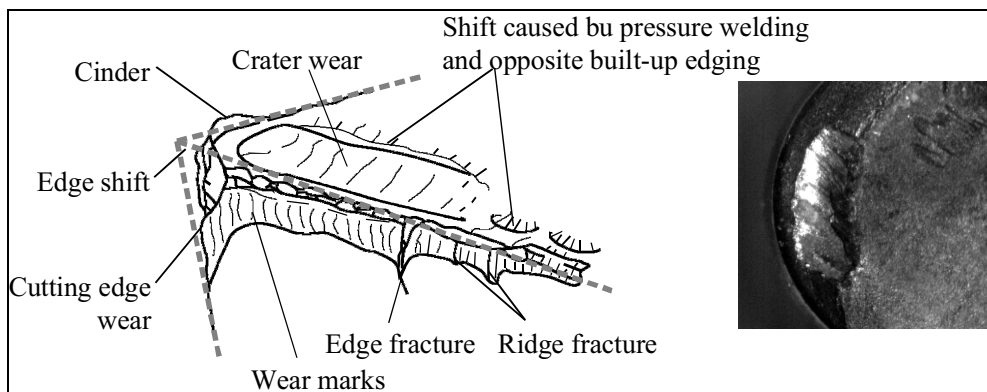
WEAR OF A CUTTING TOOL INSERT
